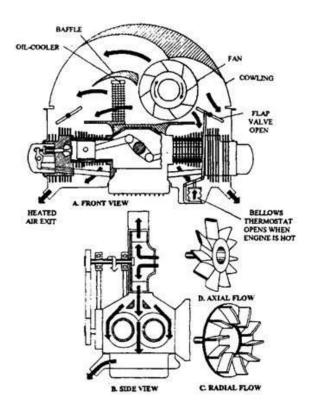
Air-cooling system for a horizontally opposed four-cylinder engine.
